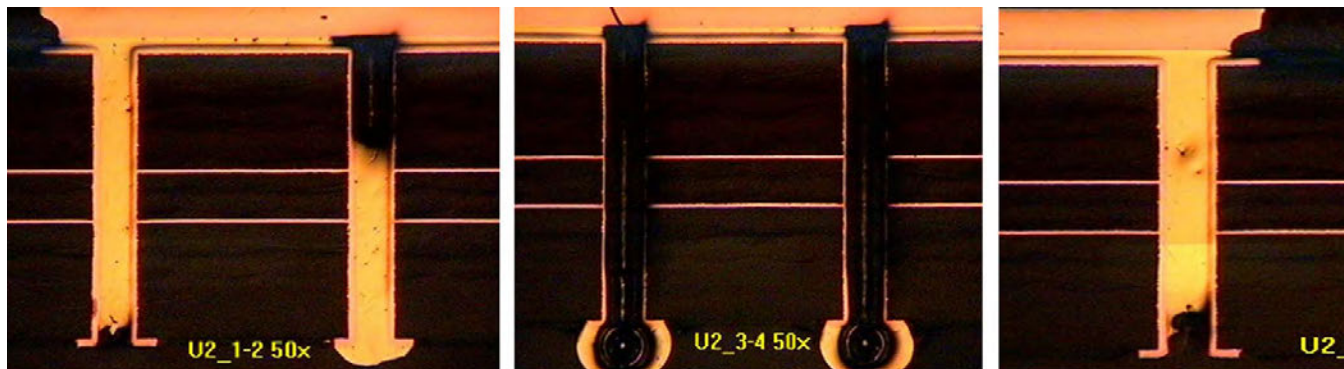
The cross-section of 0.22 mm (9 mil) via using 1.6 mm thick PCB.
